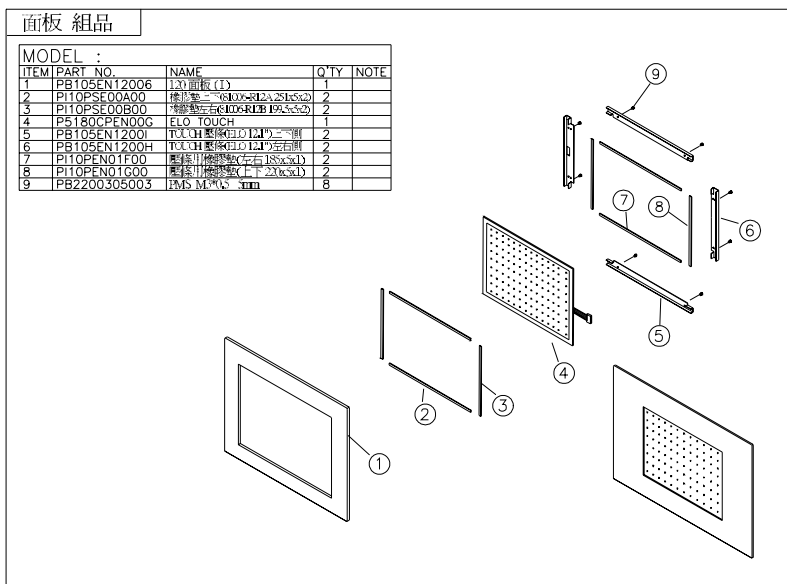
FRONT BEZEL ASSEMBLY
